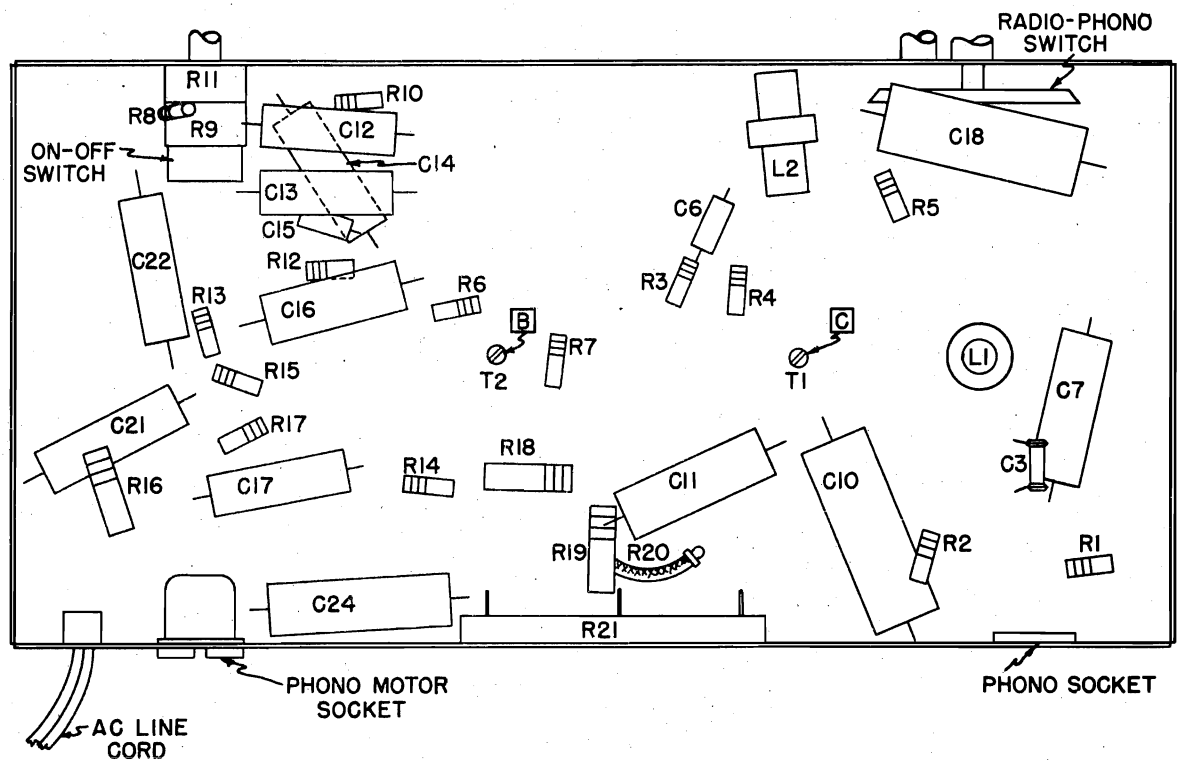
RADIO CHASSIS LAYOUT - BOTTOM VIEW
